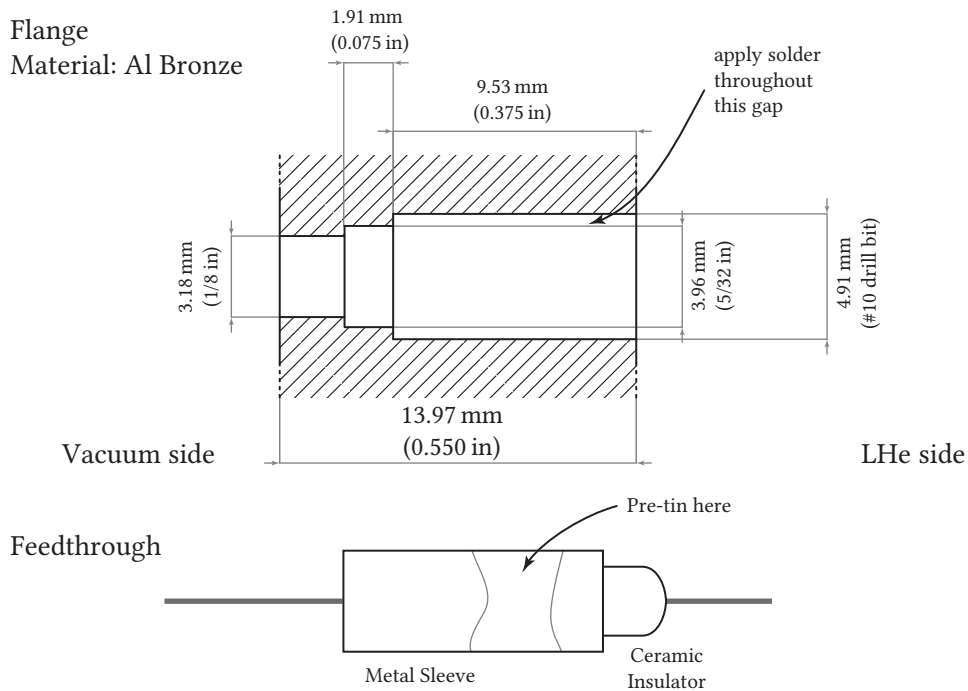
Detail of the feedthrough holes. The dimensions are a consequence of the fractional inches, decimal inches, and drill-bit-gauges used in the original drawing. Only the 3.96 mm (5/32 in) hole diameter is critical, since it is designed for a tight fit with the feedthrough sleeve. The 4.91 mm hole serves as an approx. 0.5 mm gap between sleeve and flange, which is filled with solder after the feedthrough is inserted.
